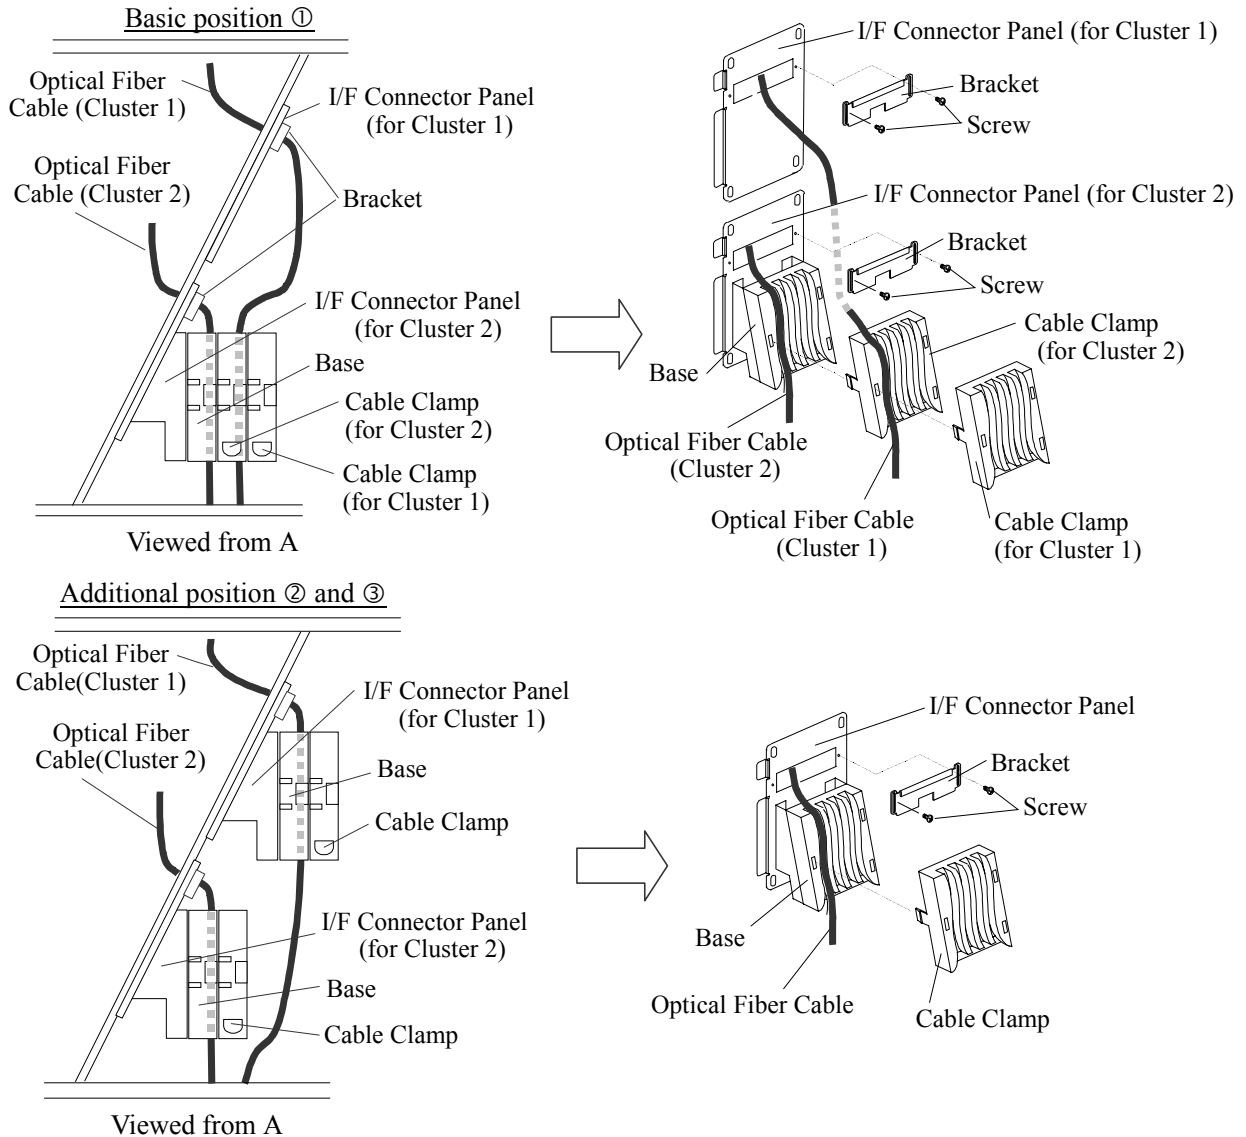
Installation of Optical Fiber Cable
